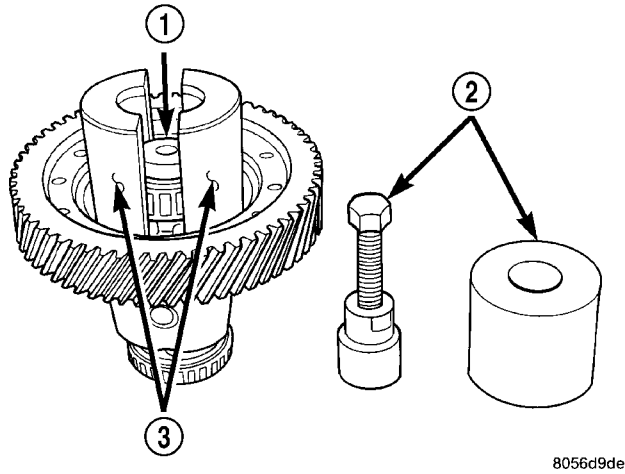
Position Button and Collets Onto Differential and Bearing (Ring Gear Side)
